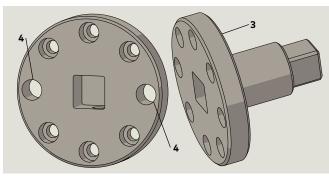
Adaptor flange mounting to Motion Assist 360 drive
